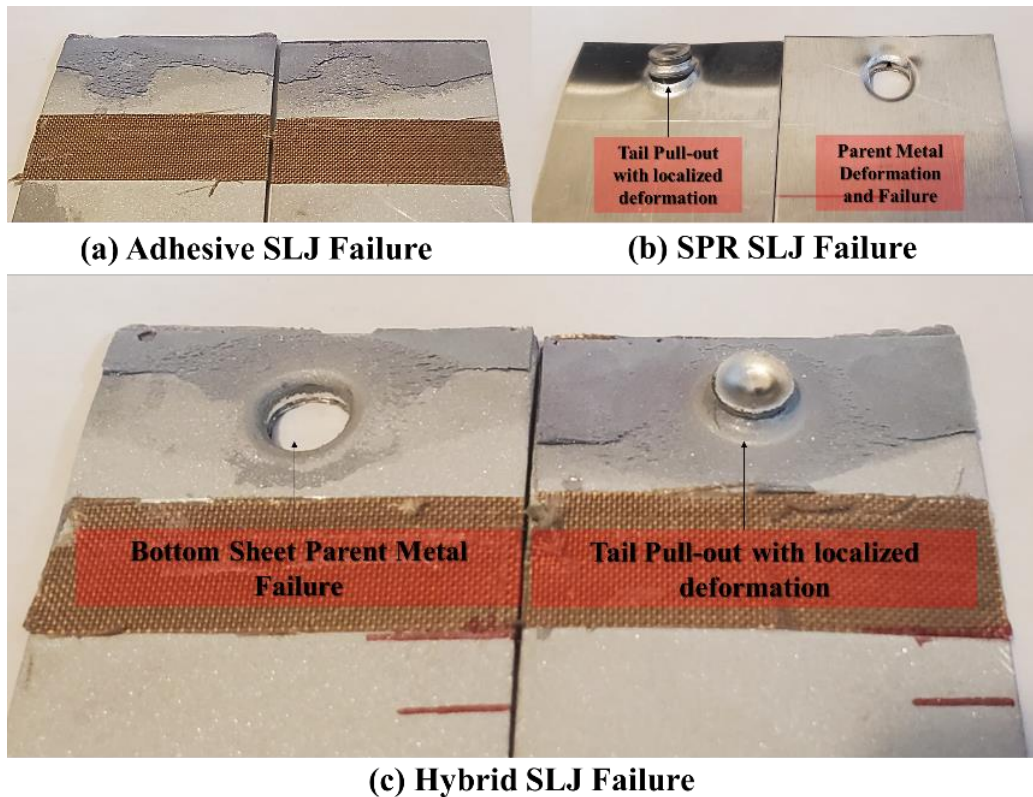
SLJ failure surfaces of adhesive (a), SPR (b) and hybrid joints (c)
